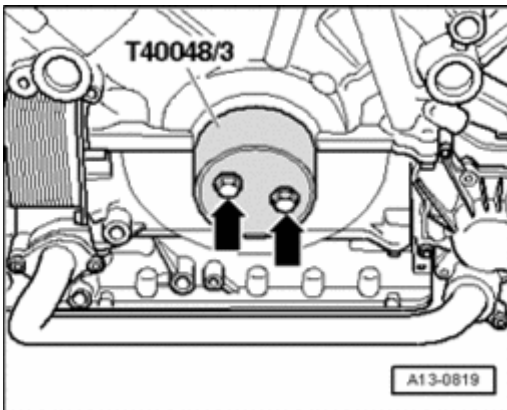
Positioning Pressure Sleeve T40048/3 With Bolts On Crankshaft
